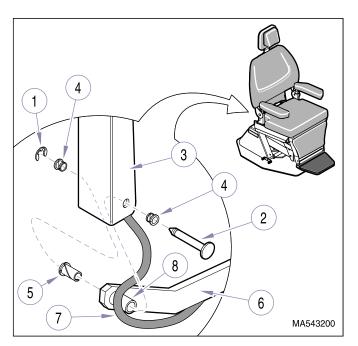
Back Section Pivot Bearings Removal / Installation
